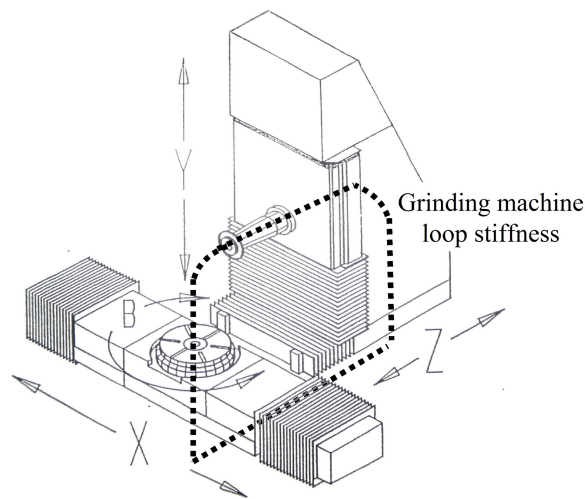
Grinding machine loop stiffness - Holroyd Edgetek machine
